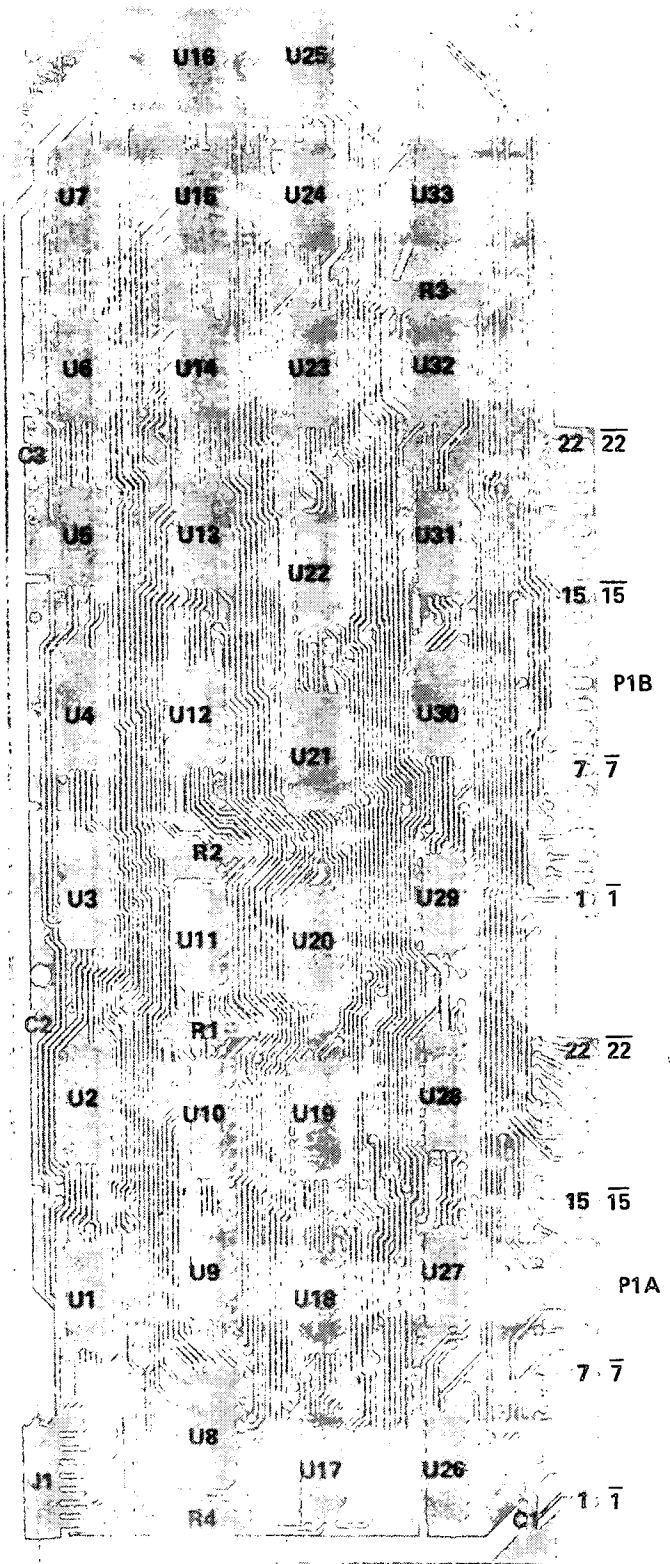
A. A12 Option 012 HP-IB Interface I/O Assembly (Sheet 1 of 2)
